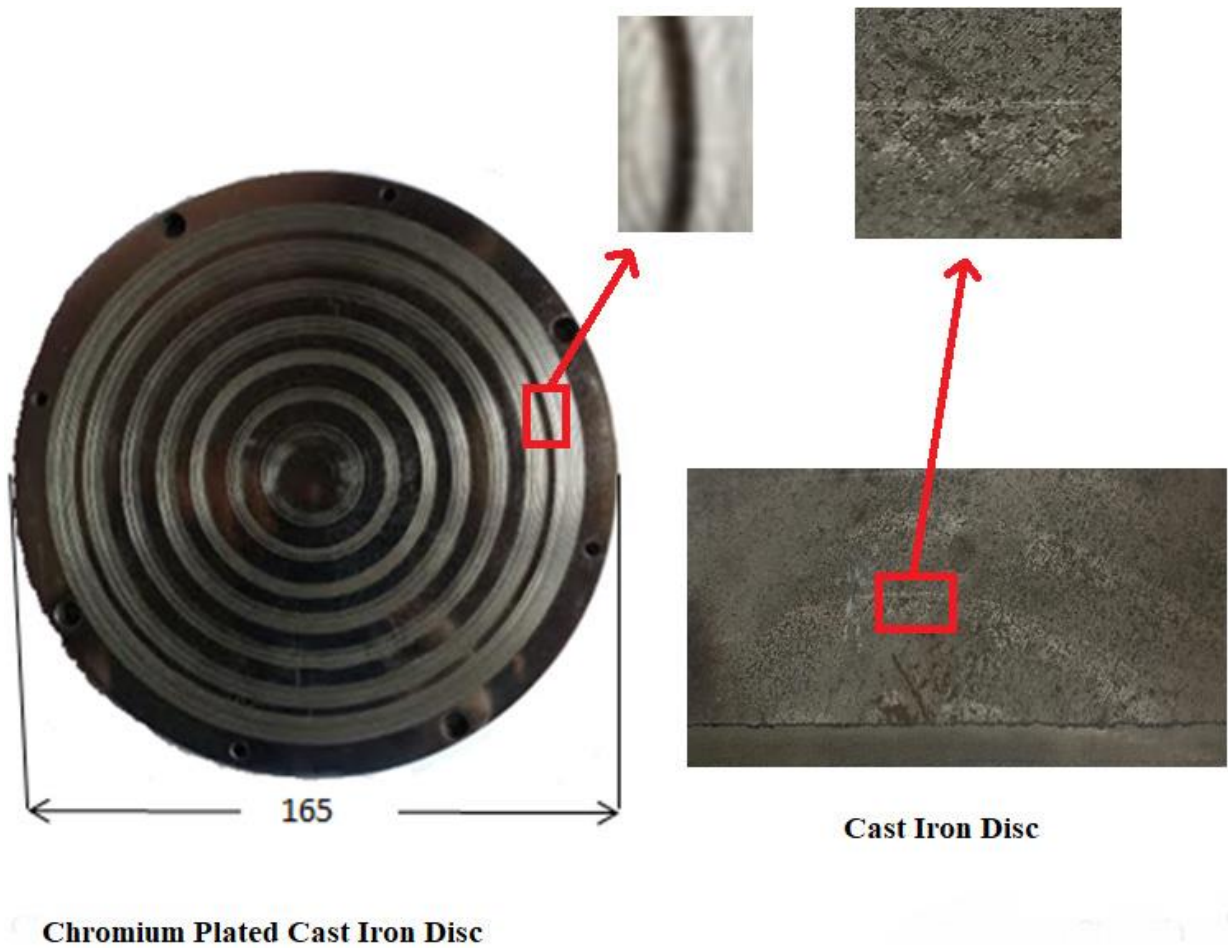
Dimensional details and extended view of worn surface tracks on disc
